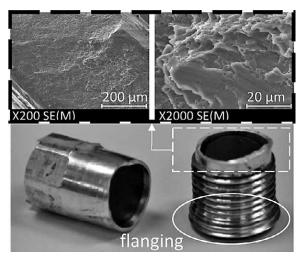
Belling of M12x1 clamping unit screw during its screwing with 21 Nm torque moment and scanning electron microscope (SEM) of fracture
